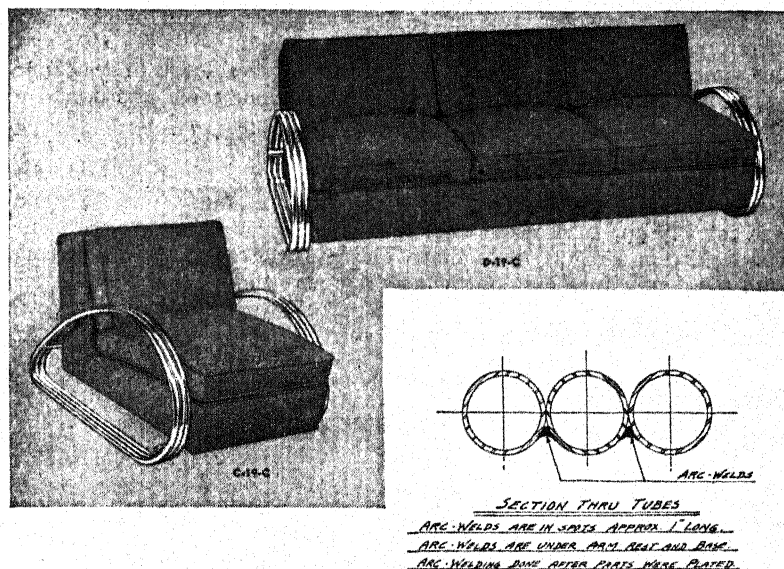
Plated tubes arc welded together made this furniture possible.
